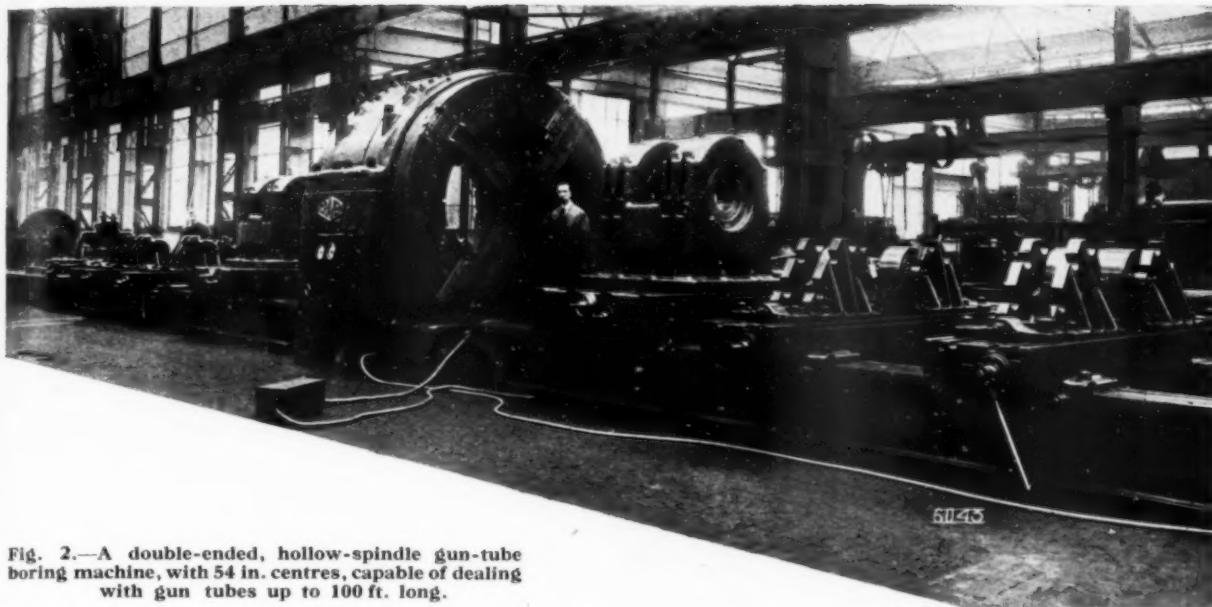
A double-ended, hollow-spindle gun-tube boring machine, with 54 in. centres, capable of dealing with gun tubes up to 100 ft. long.
